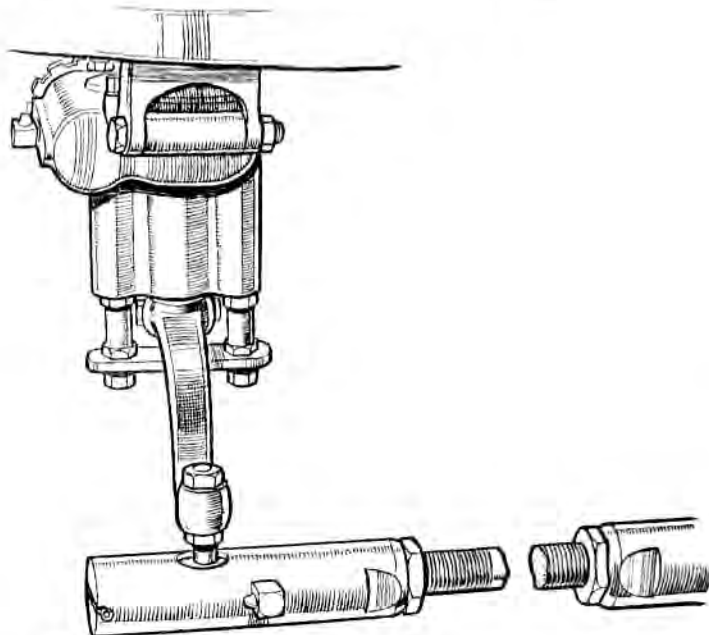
LOCK STOPS BELOW STEERING GEARBOX, AND ADJUSTMENT IN DRAG LINK FOR EQUALIZING THE LOCKS OF THE FRONT WHEEL.
